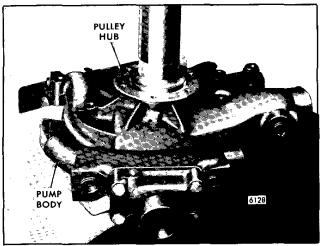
Installing Pulley Hub Using Tool J 29191
